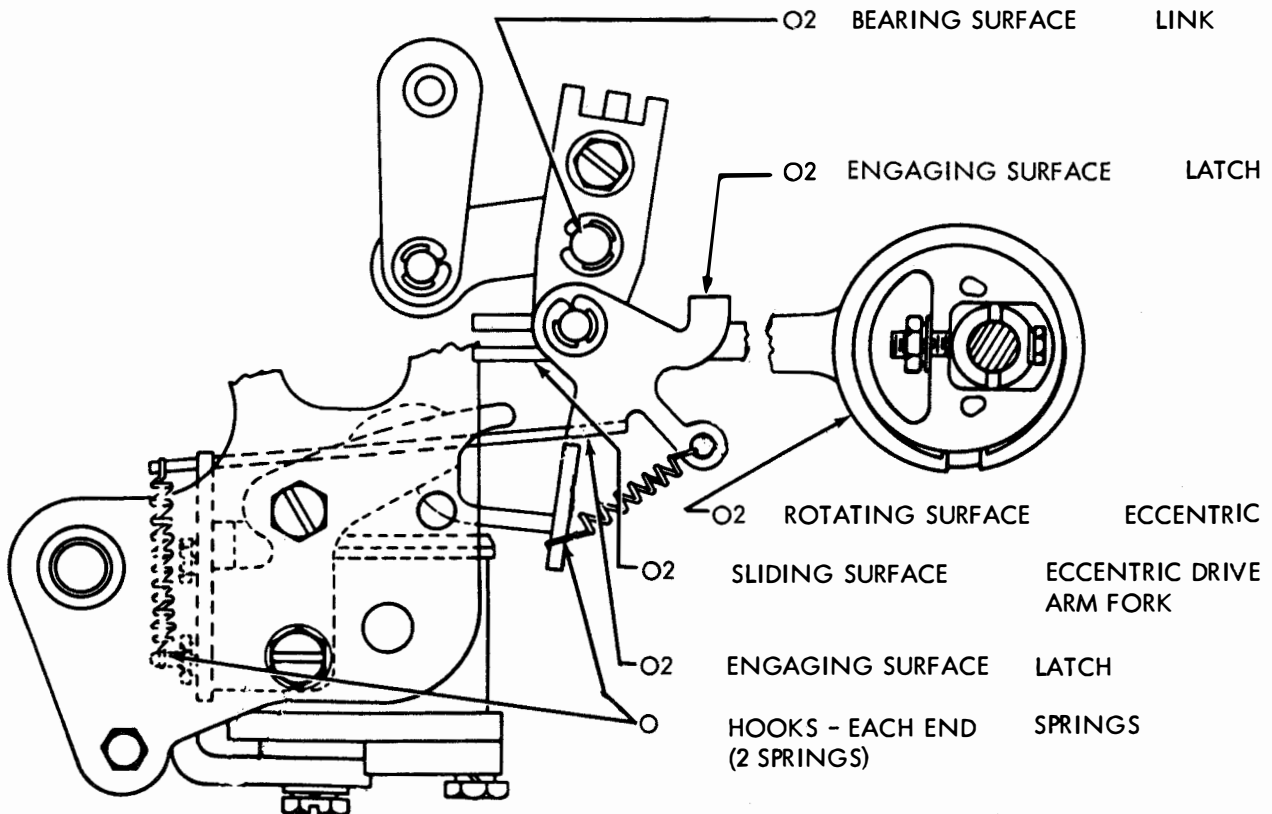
Power Drive Backspace Mechanism, Latest Design
